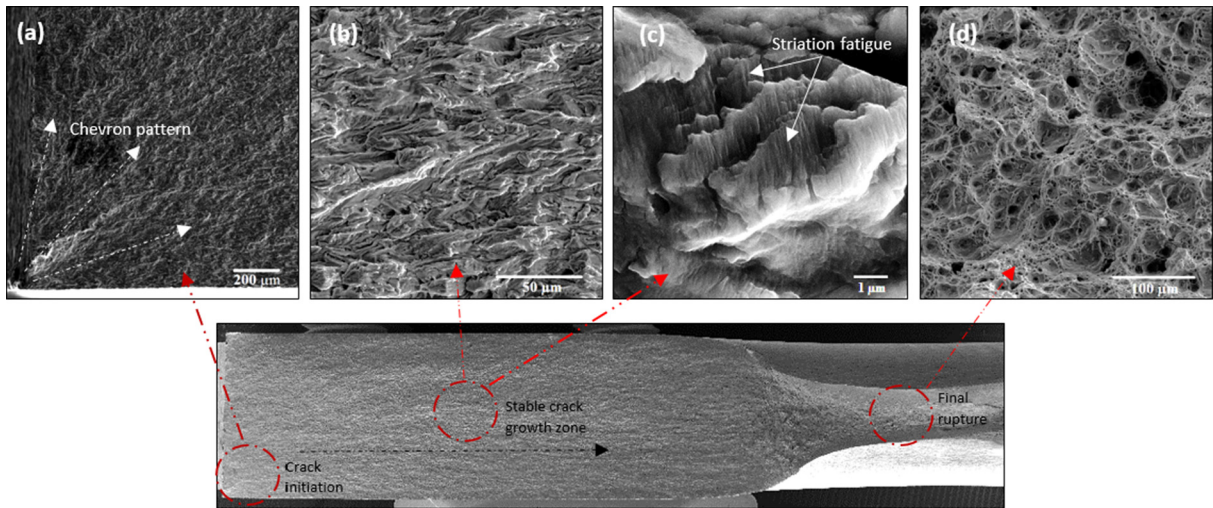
Fracture surface of specimen without LSP: (a) crack initiation, (b) crack growth, (c) fatigue striation and (d) final rupture.
